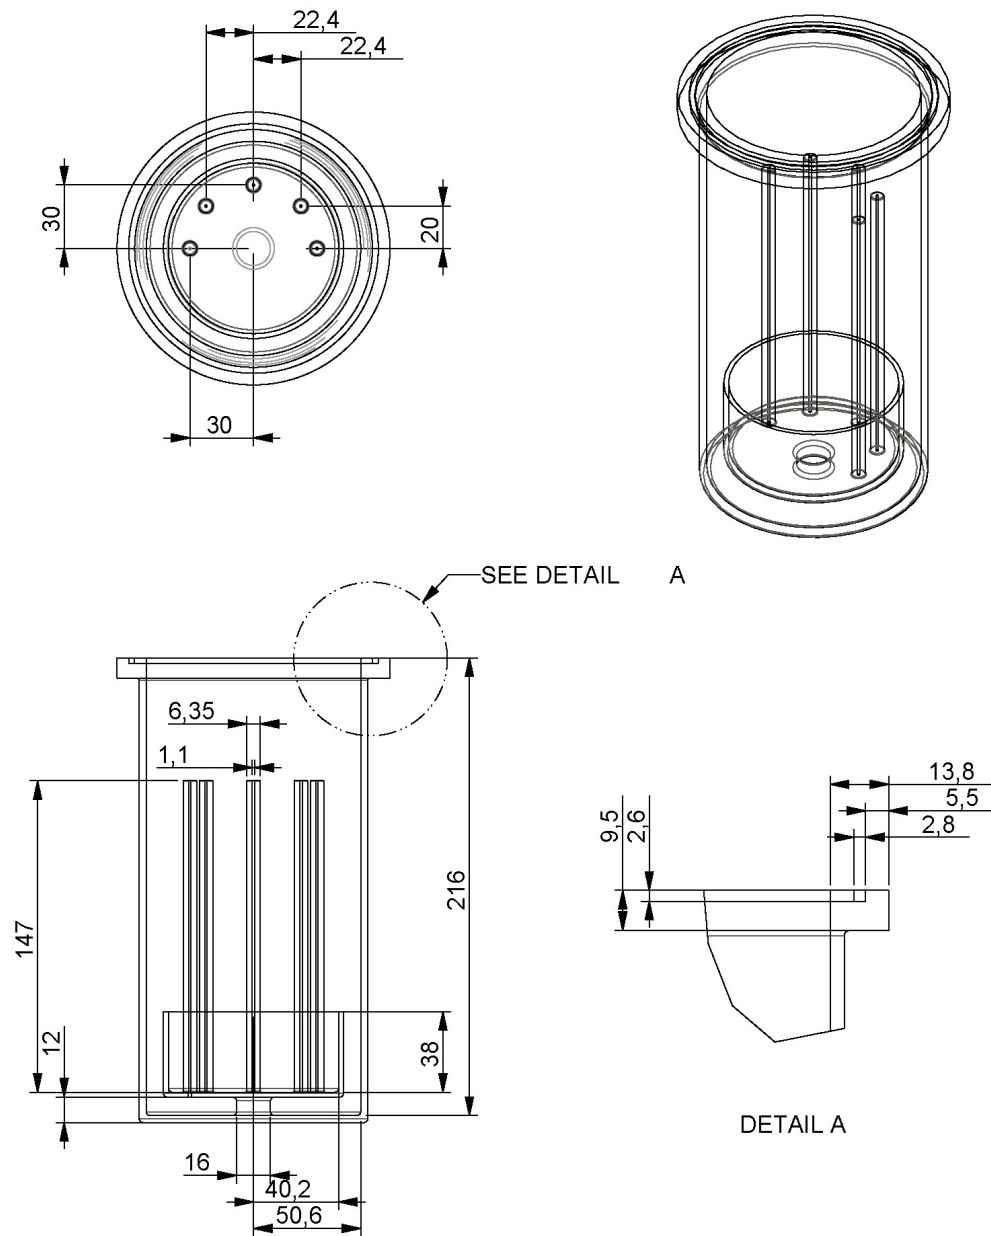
Technical drawing of container one. All dimensions are in millimeters. The tube thickness is approximately 3.3 [mm].
